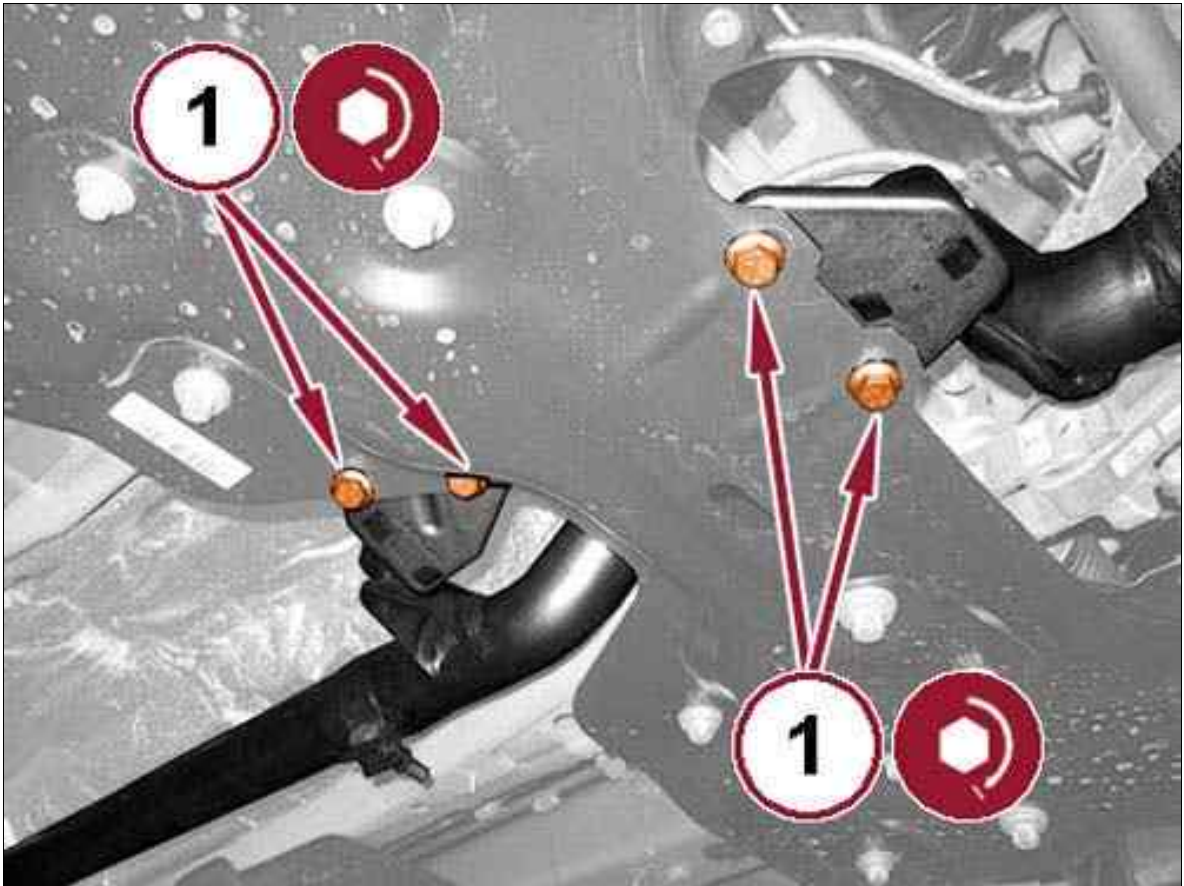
DPF Flange Nuts & Crossunder Pipe Bracket Bolt
